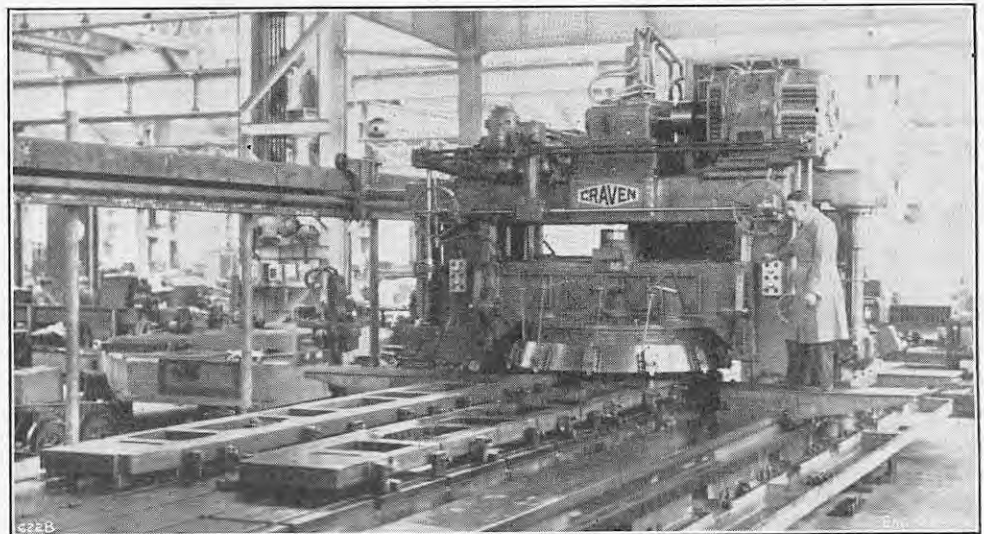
USING ONE MILLING CUTTER ON FRAME SLABS.
